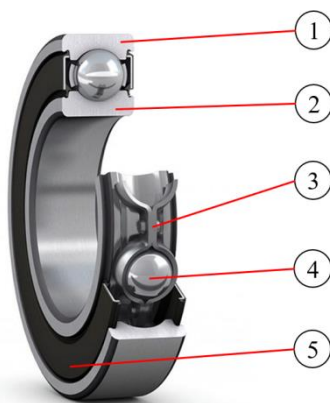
Rolling element bearing structure: (1) outer ring, (2) inner ring, (3) cage, (4) rolling element, and (5) bearing seal [3].
